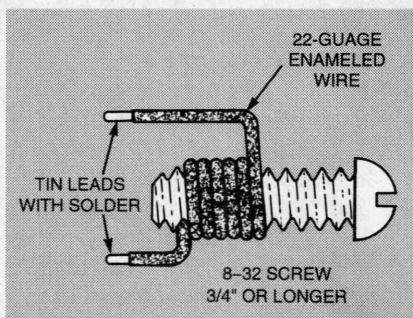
The coils needed by the Video IF units are easy to make when a machine screw is used as a winding form.
